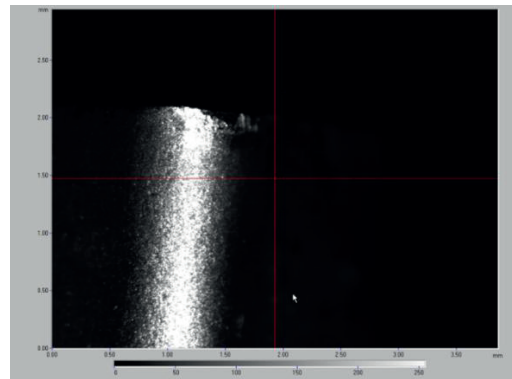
Cutting insert DSSNL 2525M-12 after machining
